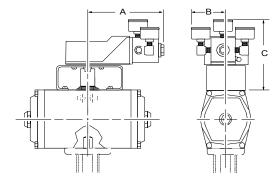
V-9000 Series Pneumatic Actuator Dimensions (in.)
